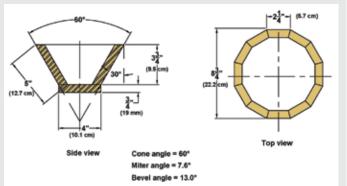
Dimensions and angles for the example project. This is a CAD drawing, but a hand drawing will work just as well.
